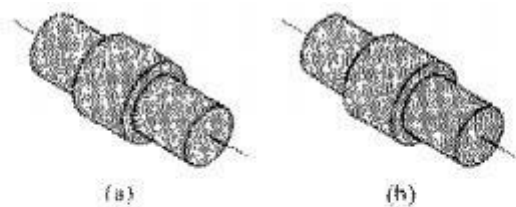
Two parts of identical shape and size but different manufacturing requirements: (a) 1,000,000 pc/yr, tolerance = ± 0.010 in, material = 1015 CR steel, nickel plate; and (b) 100 pc/yr, tolerance = ± 0.001 in, material = 18 - 8 stainless steel.
